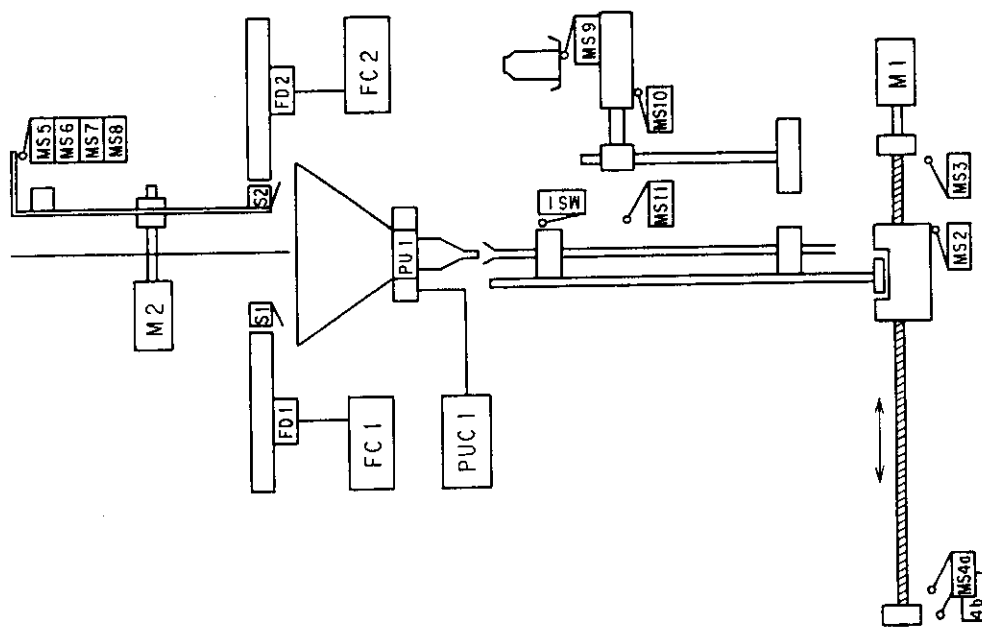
Parts of assembly jig for  $^{192}\text{Ir}$  seed assembly
